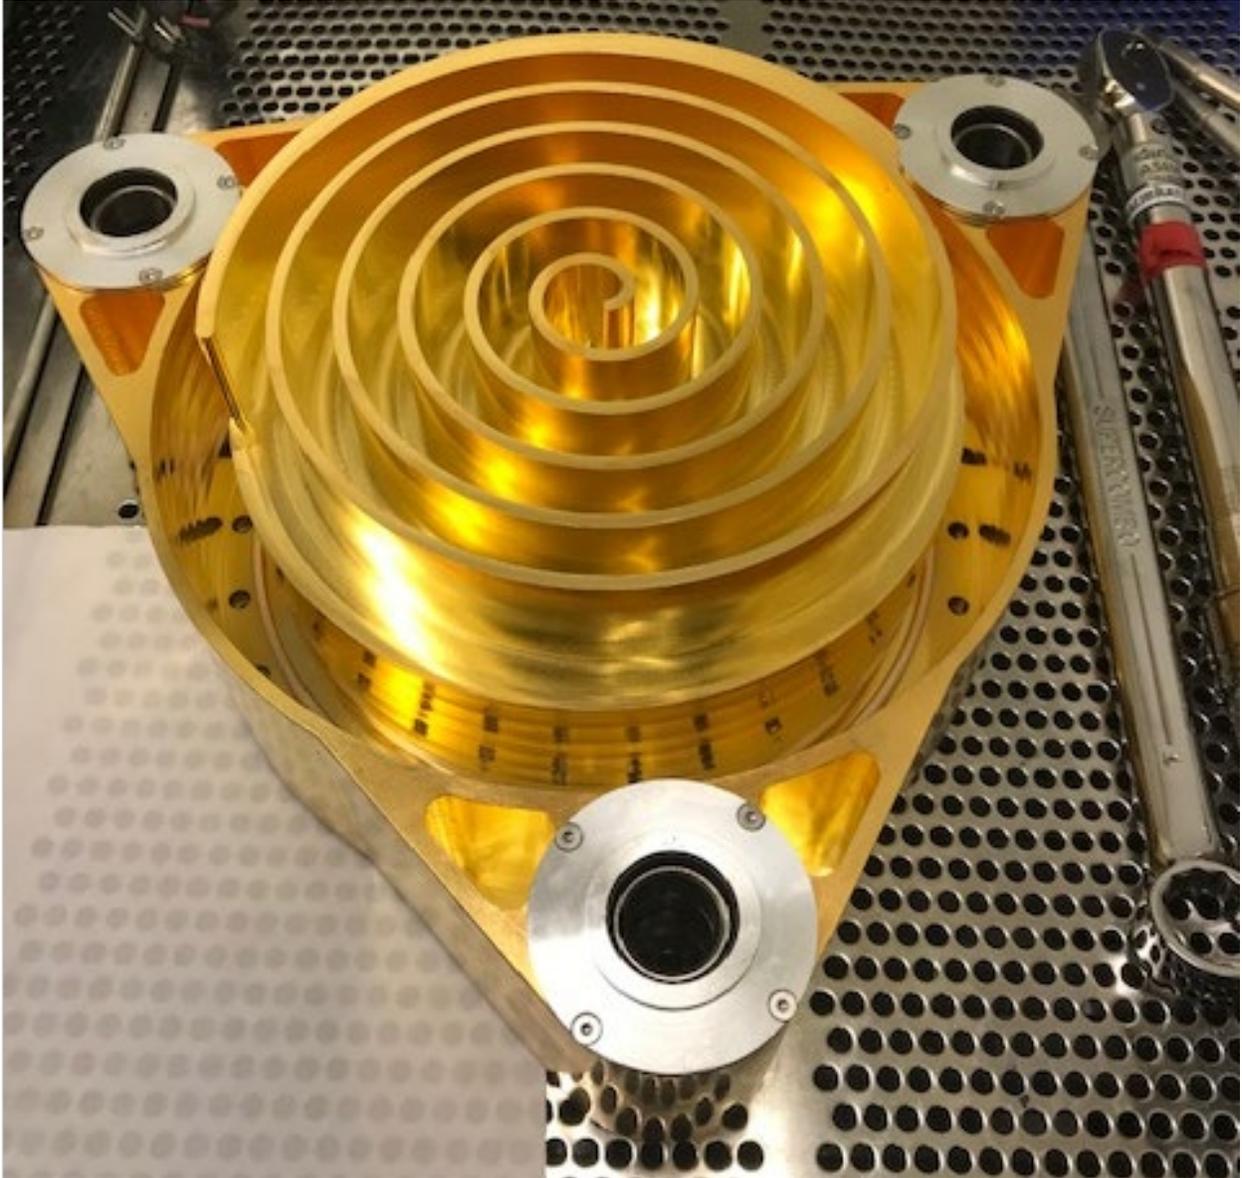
Rotating scroll after it was removed from the containment bellows.
